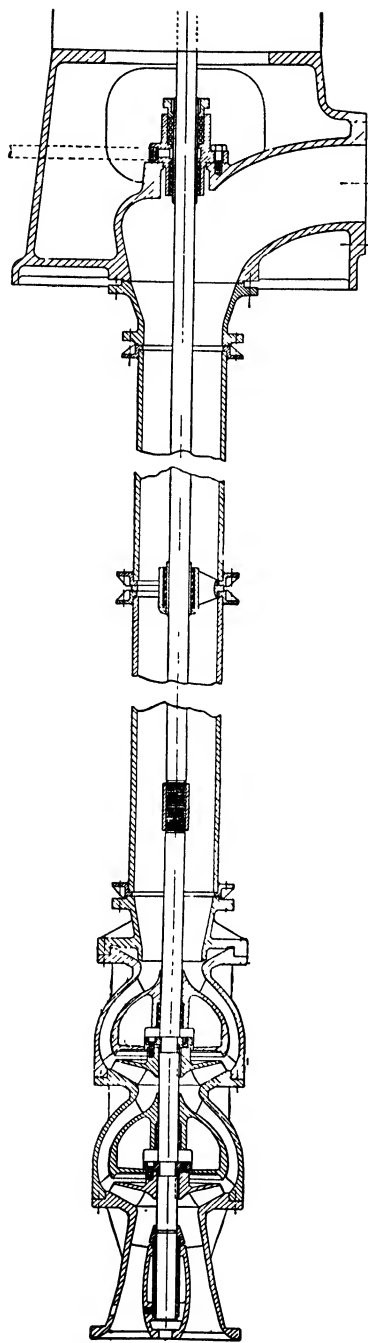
Ingersoll-Rand vertical turbine pump with water-lubricated bearings.
